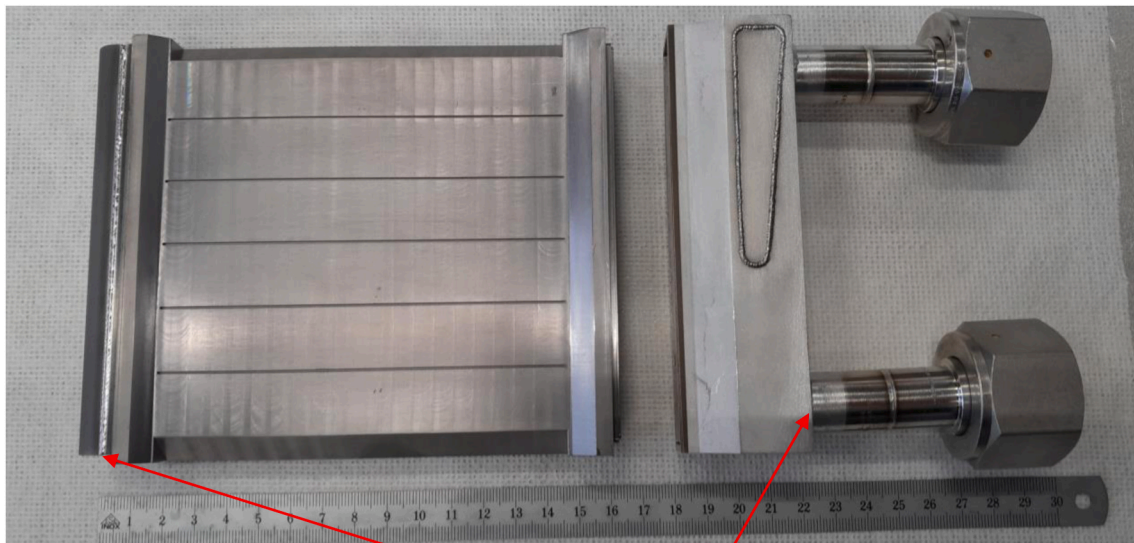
Target pre welding; flow deflector to main Ta body; water cooling tubes and bimetal adapter
